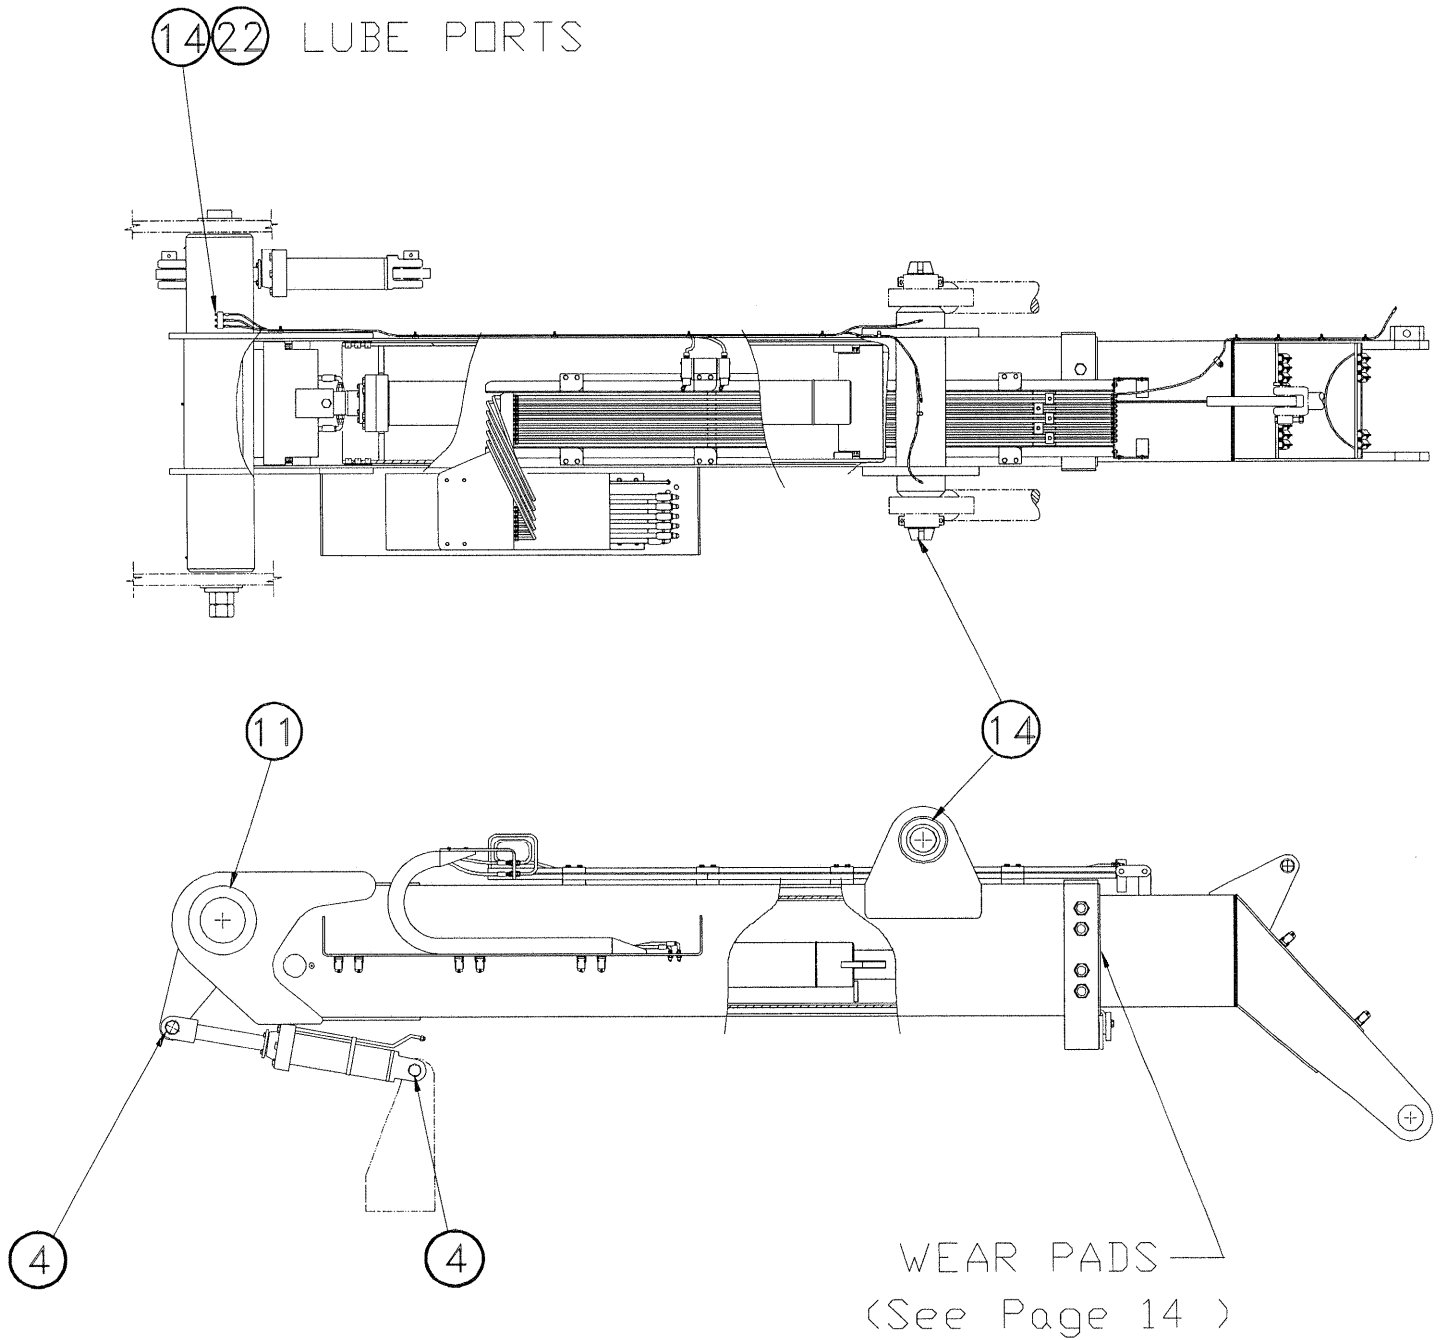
NCH 35 Boom Assembly Maintenance and Lubrication Chart
